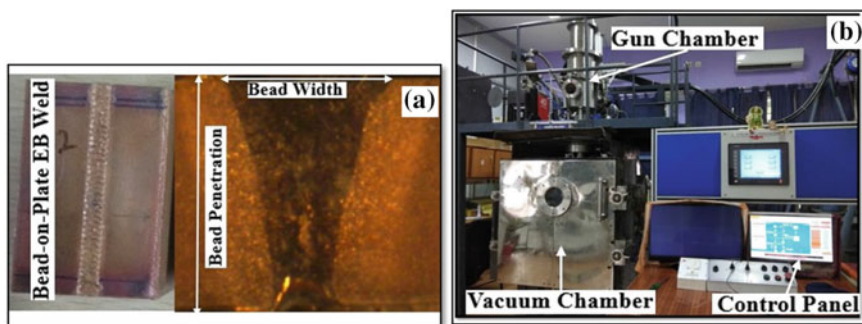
Photograph of a weld bead geometry and b electron beam welding setup
